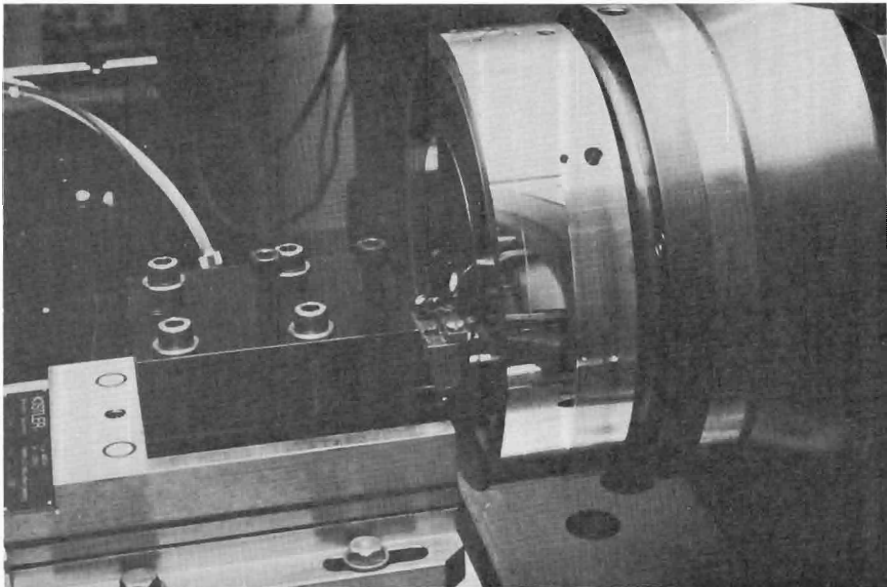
Example of ultra-precision achieved with S2M inductive sensors technology: spindle for optical lenses machining. Machining accuracy: 0.05 micrometer.
